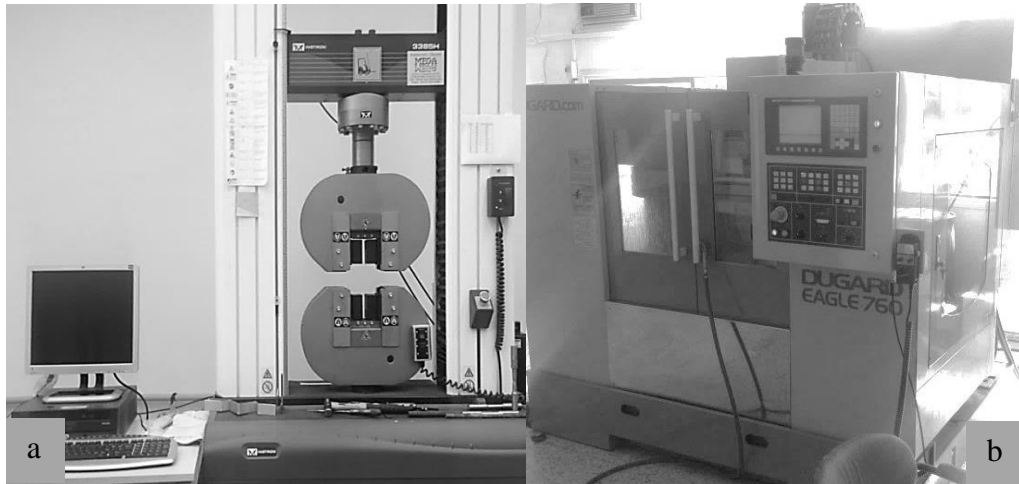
(a) The tensile test machine (b) CNC cutting machine.
